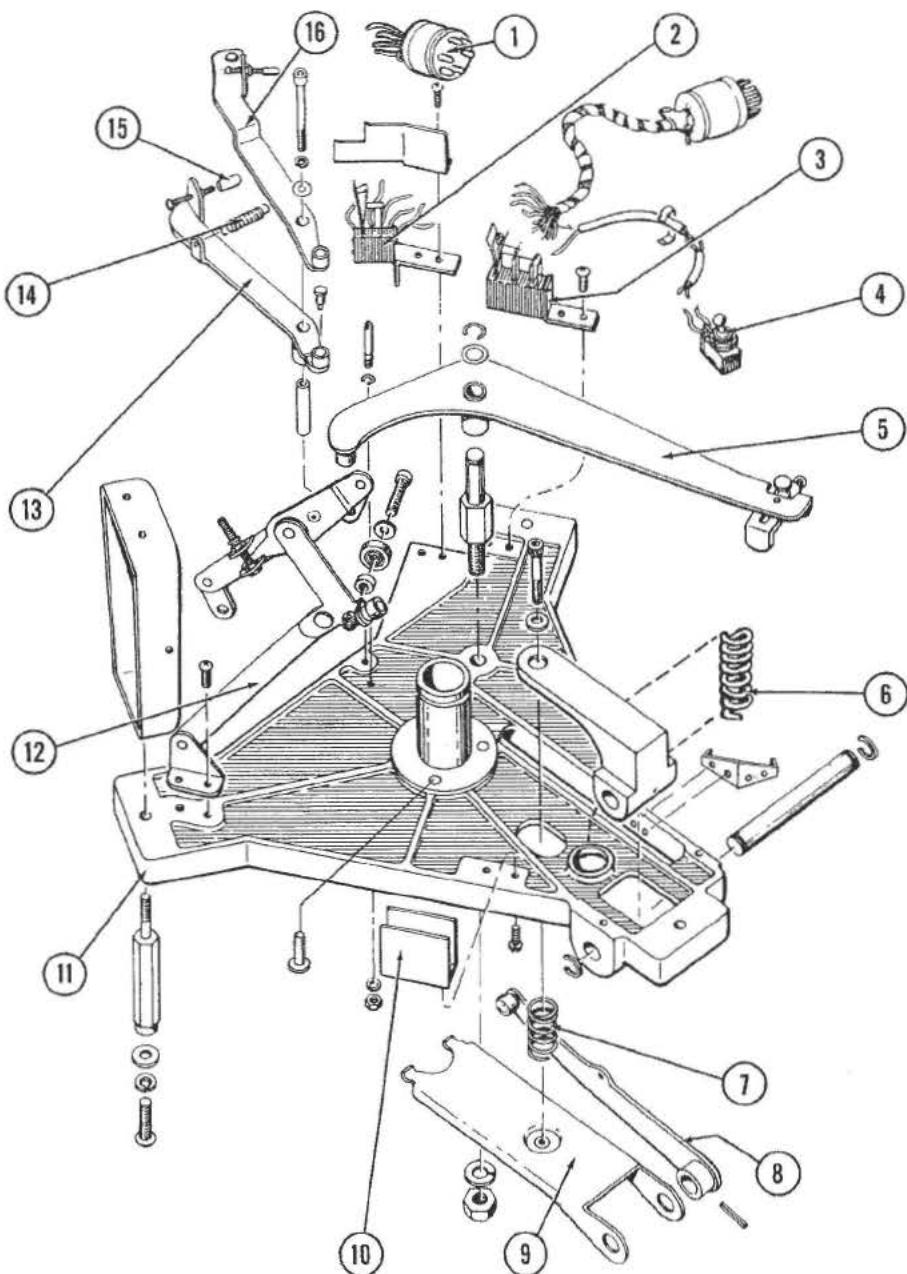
CHASSIS FRAME CASTING AND SHAFT ASSEMBLY, 2404-2404S
